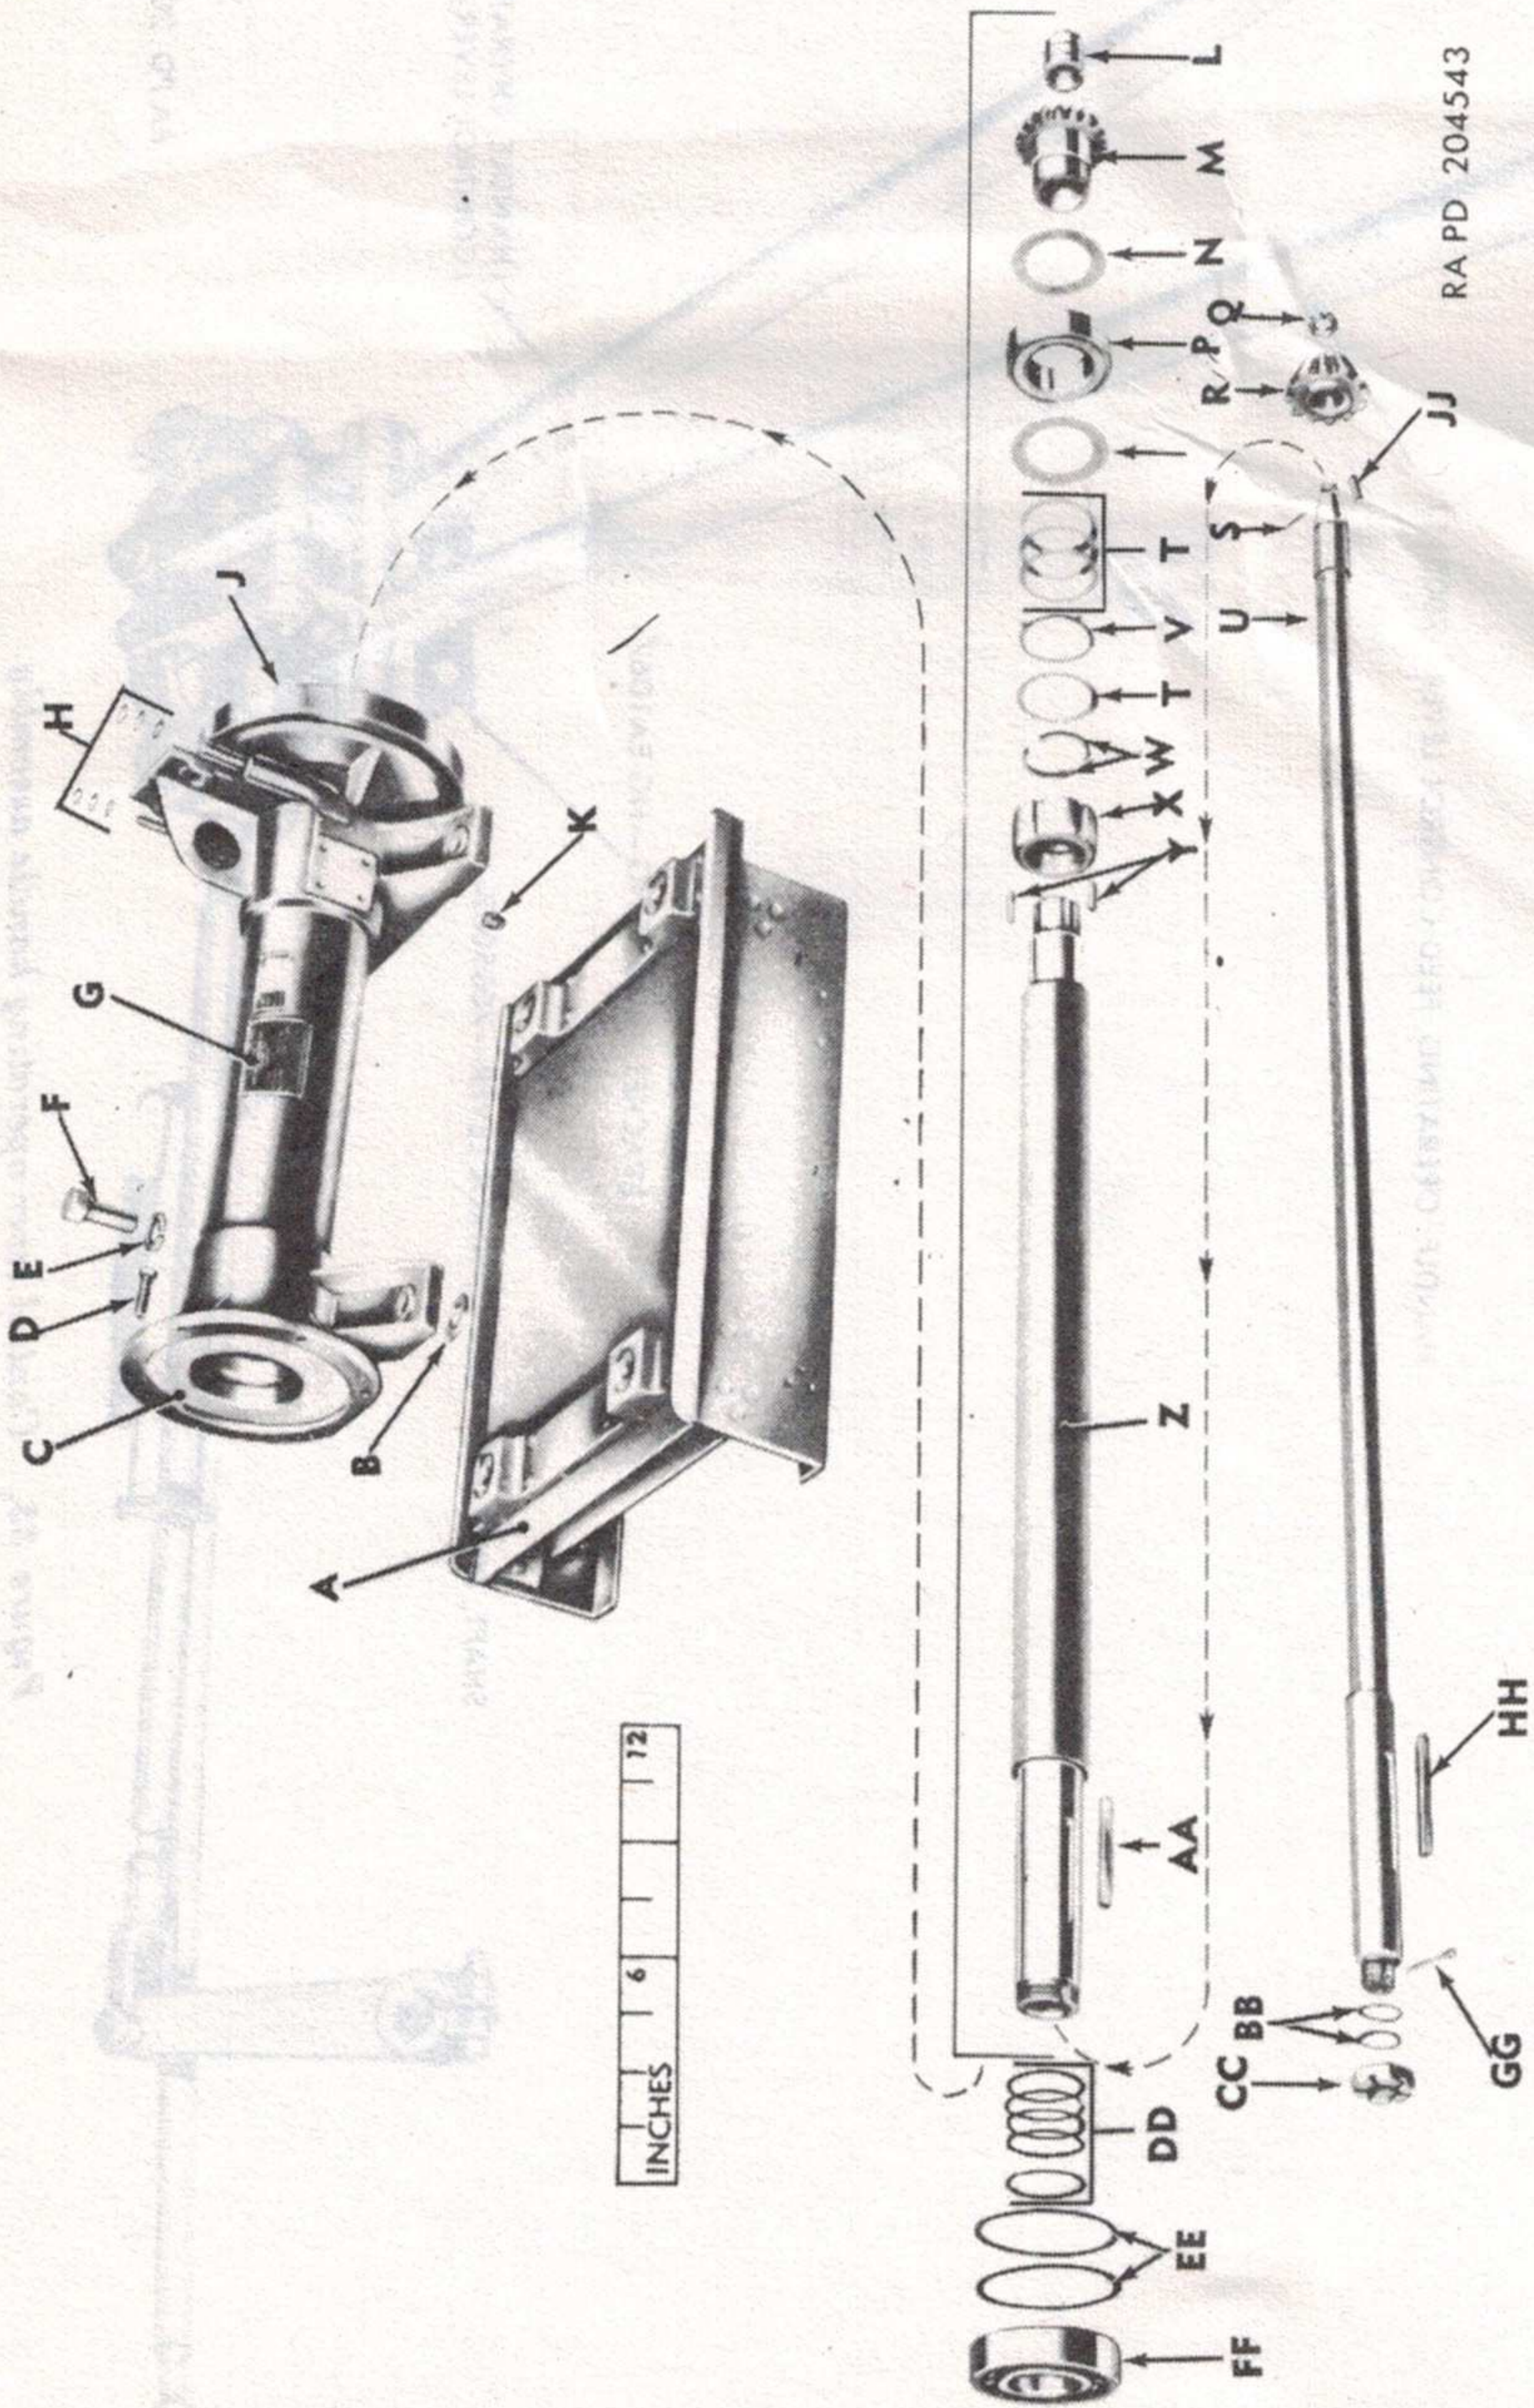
Feed and drive clutch shaft tube and mounting base assemblies—exploded view.
